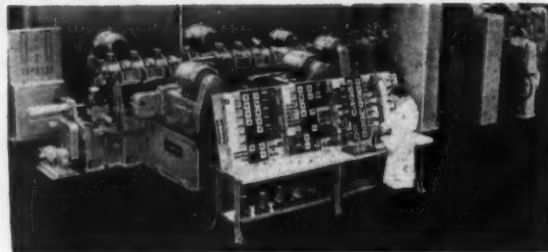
Centralized machine control boards give visual indications of individual tool wear and automatically stop machines when tool changes are necessary.
